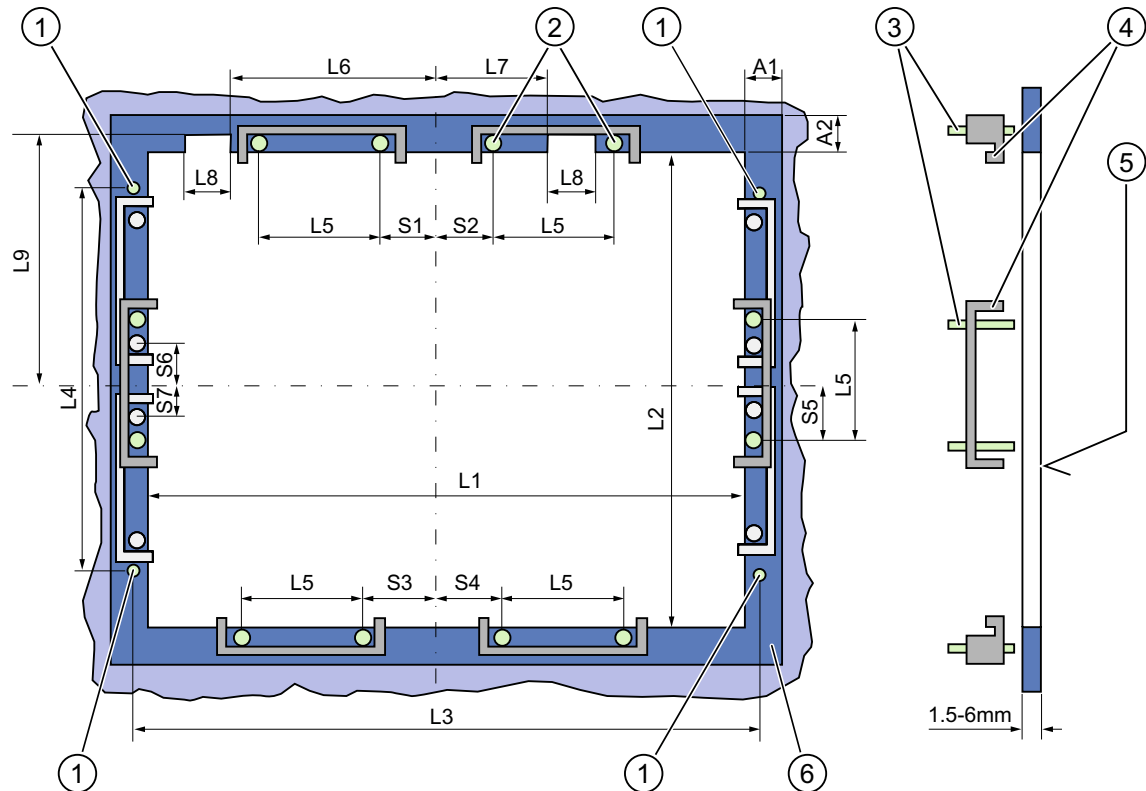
Drill holes for the screws and pressure points for the clamp screws
